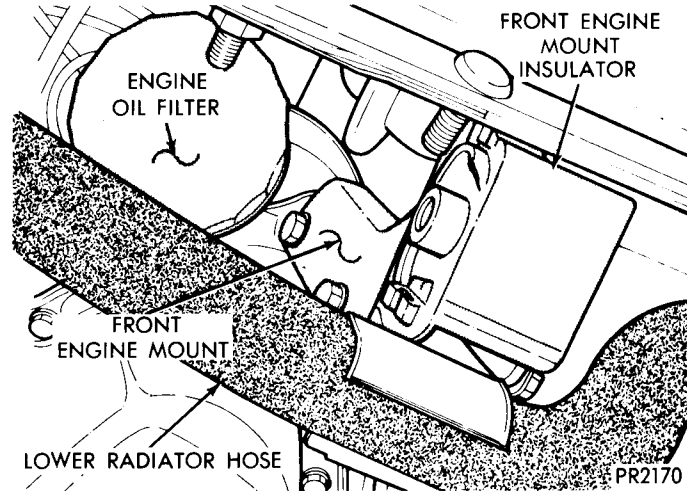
Remove or Install Front Mount Insulator Through-Bolt and Bell Housing Bolts
